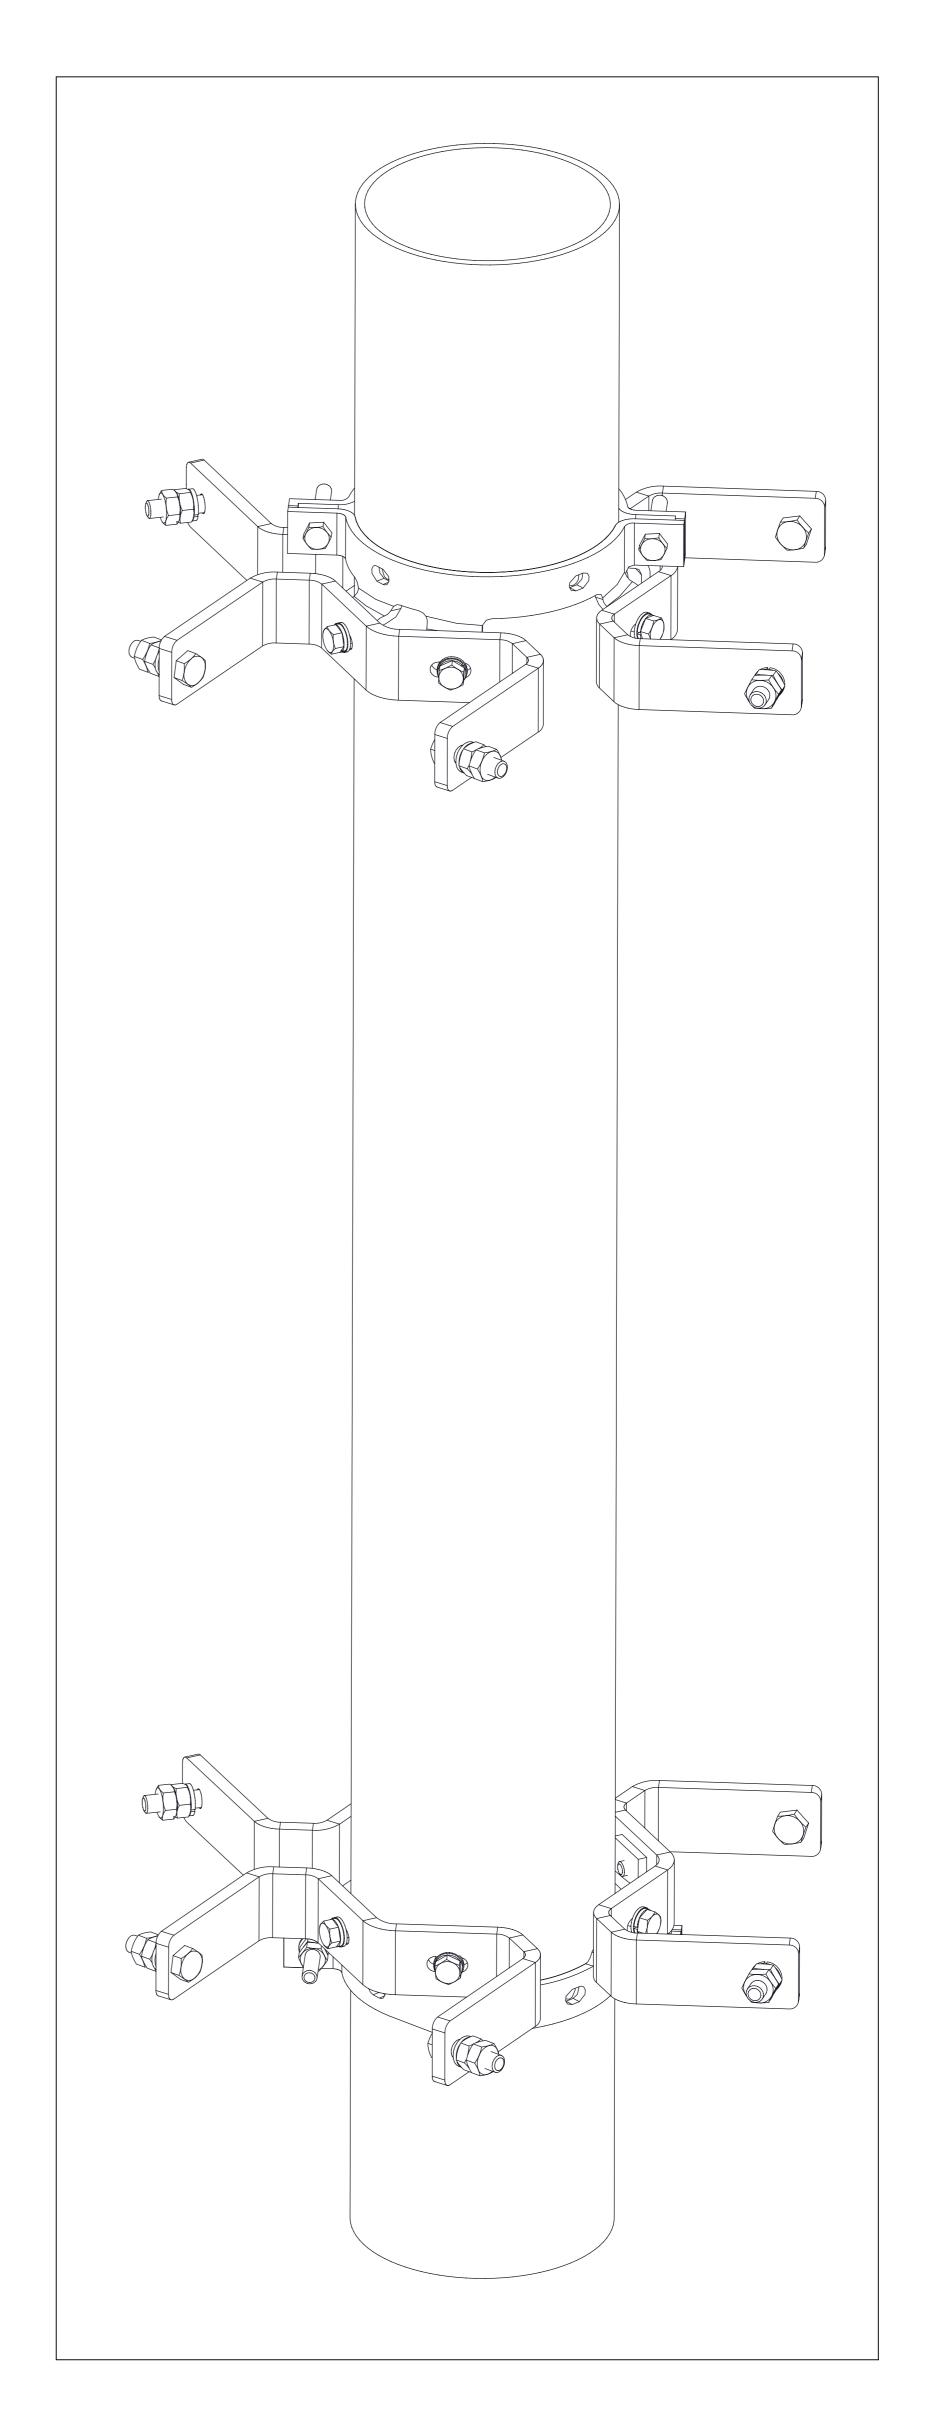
Top and Bottom Hardware Assembly for 139.7mm(5.5") Pole.
